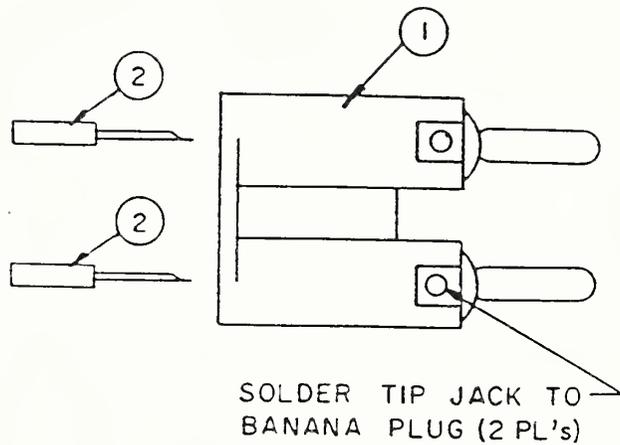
Banana Connector to Test Probe Adapter, Assembly Drawing
